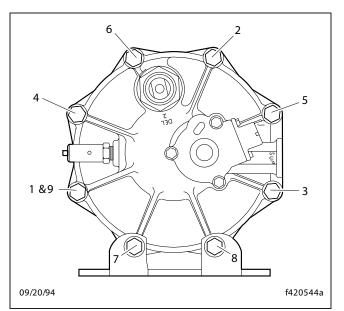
Bendix AD-9 End Cover to Housing Torque Pattern
